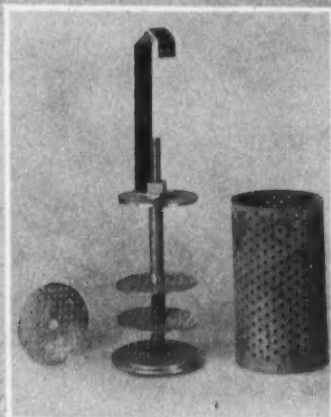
(1/4" or 1/2")—This fixture is designed for small parts that are suitable for both anodizing. The cylinder is of "micarta" and is 12" long and 6" in inside diameter. The balance of the fixture is of 34 ST Aluminum. The cylinder will be drilled to the customer's specifications. Standard diameter holes are 1/4" or 1/2". Aluminum sleeves are furnished with each fixture. This is to be used when a partly filled basket of parts is being run. The two spacers shown in the photograph below the intermediate plates are for photographic purposes only to show the fixture more advantageously.
